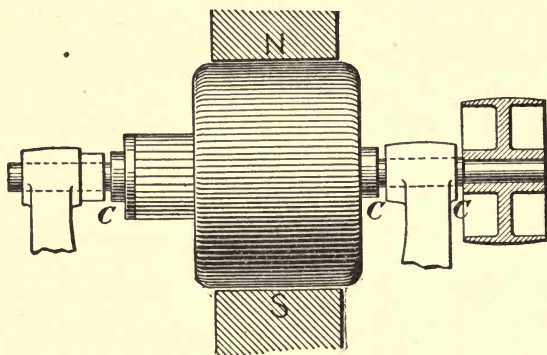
ARMATURE WITH GOOD CLEARANCE AT C.C.
